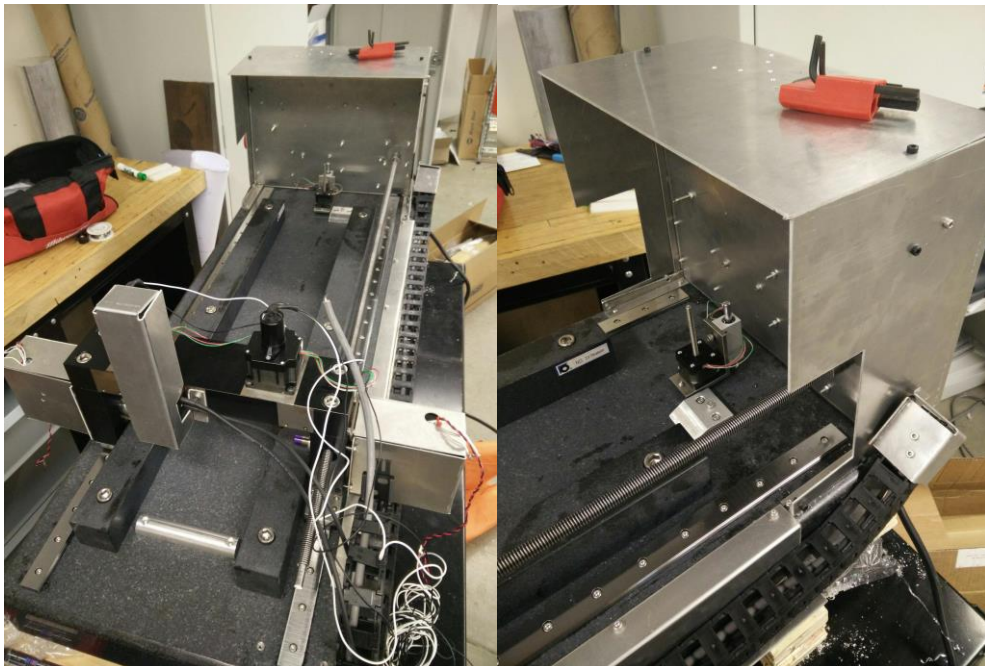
Assembly of XBAS. The various subassemblies and constraints can be seen being assembled onto the granite plate.
